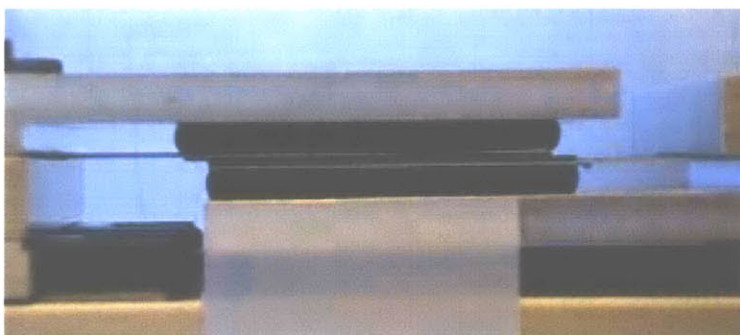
Assembled blade flexure fixture with foam preload behind the silicon devices
